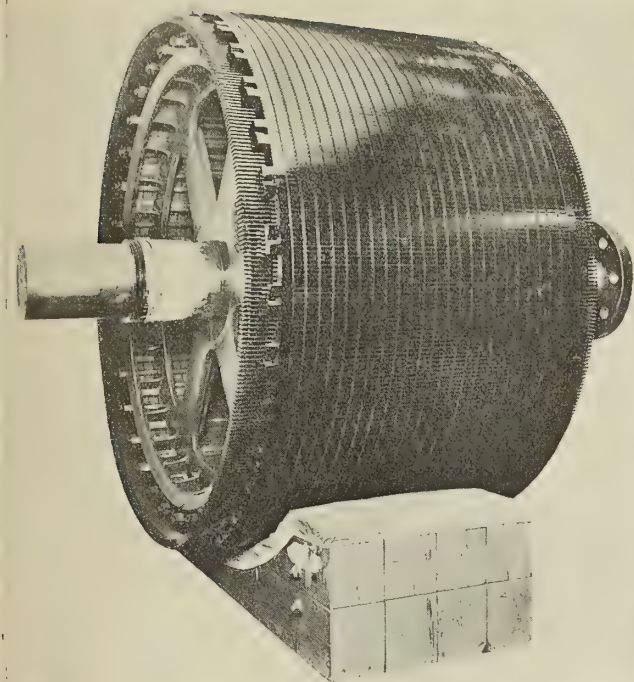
Double Squirrel Cage Induction Motor Rotor
